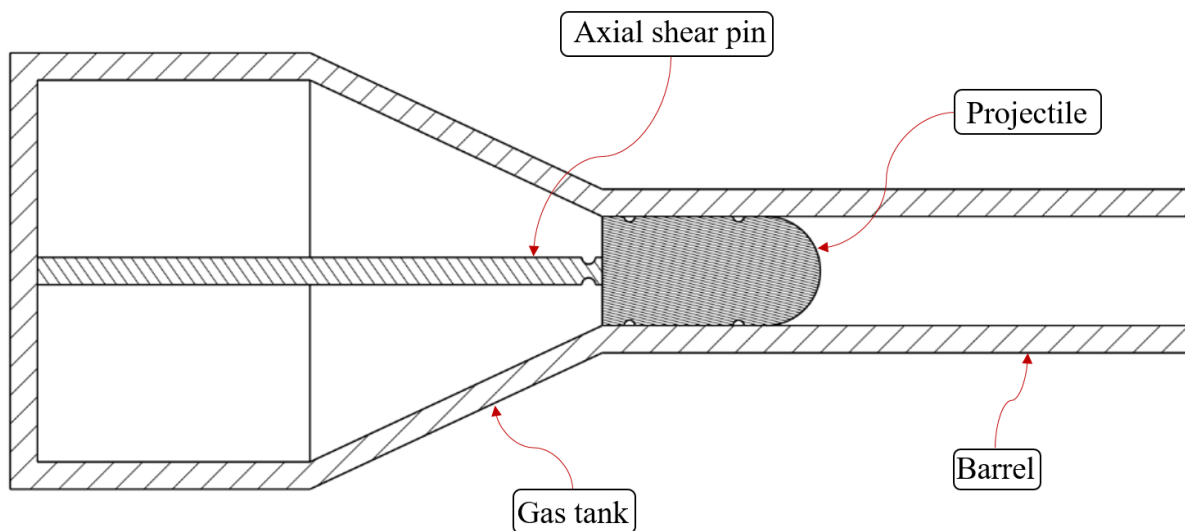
Drawing of concept 1, axial shear pin design. Containing a gas tank, an axial shear pin, a projectile and a barrel.
